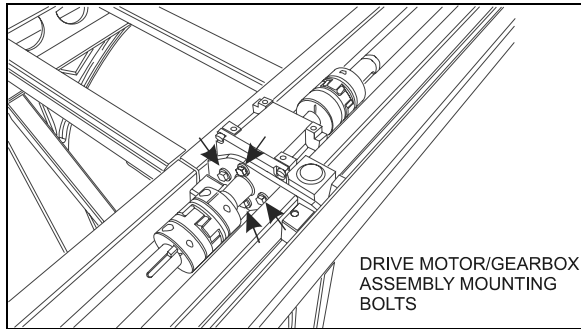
DRIVE MOTOR/GEARBOX ASSEMBLY MOUNTING BOLTS
